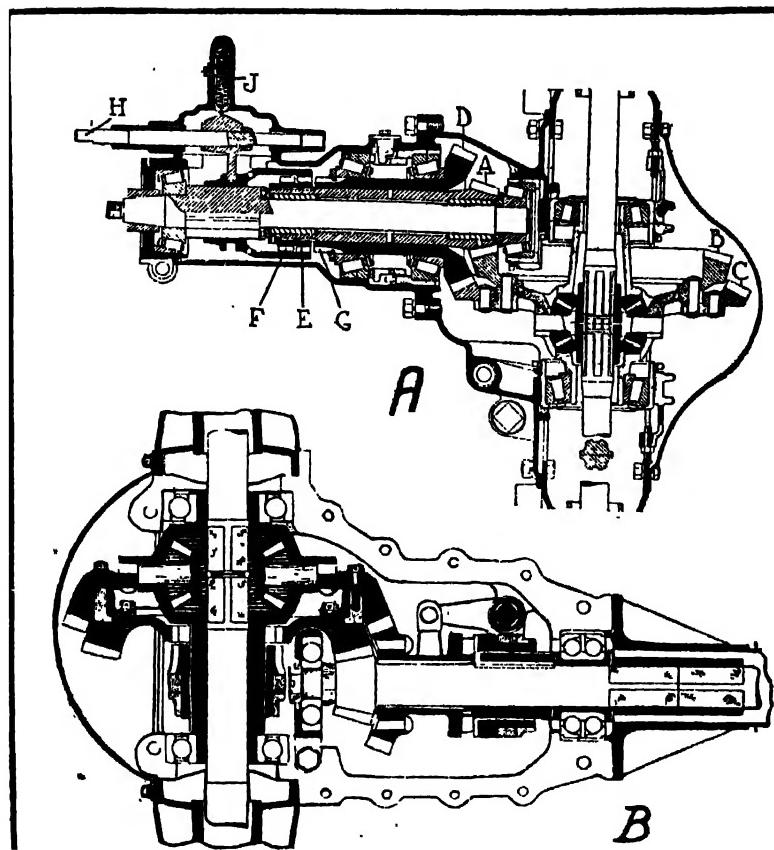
Examples of Two Speed Rear Axle. A—Cadillac 1914.
